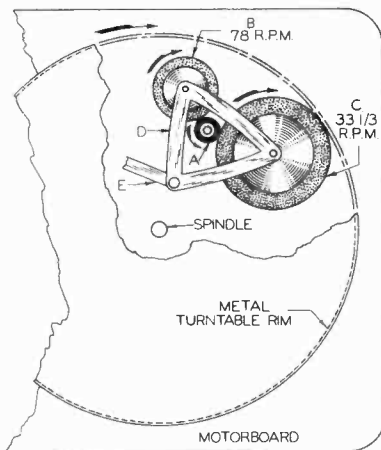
The small rubber-tired wheel A is on the motor shafts and drives both B and C at the same time. Either one of these engages and so drives the turntable at the speeds indicated.
